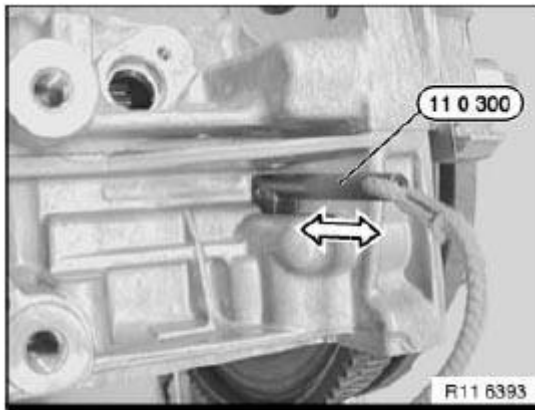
Securing Engine In Firing TDC Position Of 1st Cylinder With Special Tool (11 0 300)
